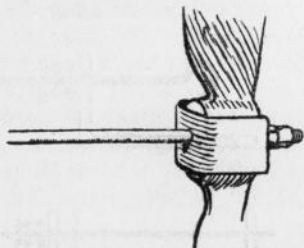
A driving clutch made out of a piece of bent strip soldered to the screw shaft. This allows the screw to be easily mounted and dismounted.
